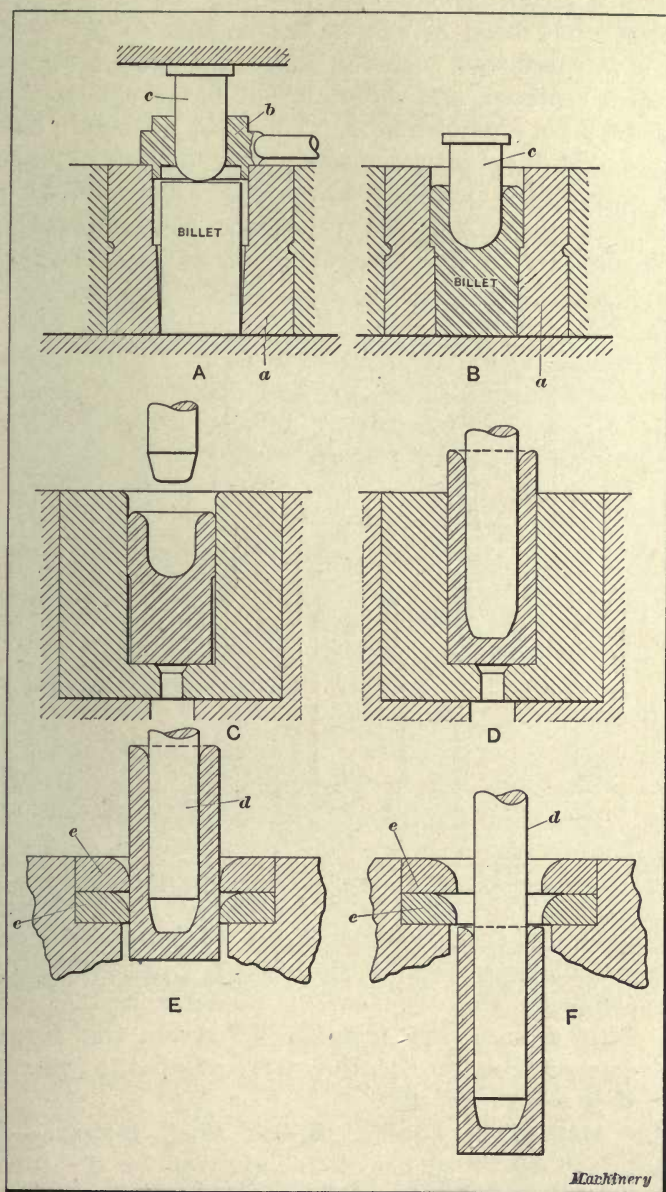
Three-operation Method of making 4.5 British High-explosive Shell Forgings
